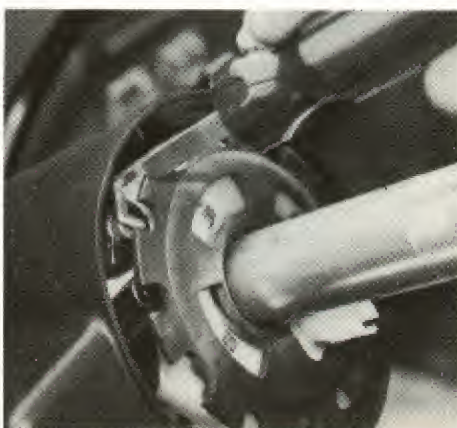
Use the BT213 Steering Shaft tool to turn the shaft and steering wheel locking plate to the right position. The notch in the tool must align with the block tooth (the non-splined area) of the steering shaft.
